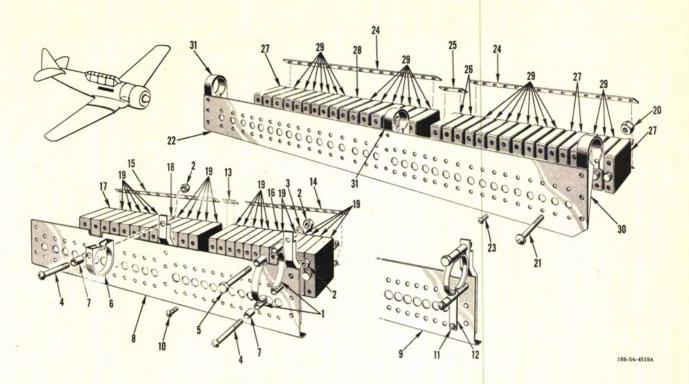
A -	ELECTRICAL	CIRCUIT	BREAKER	PANEL	AND	ATTACHING	PARTS
